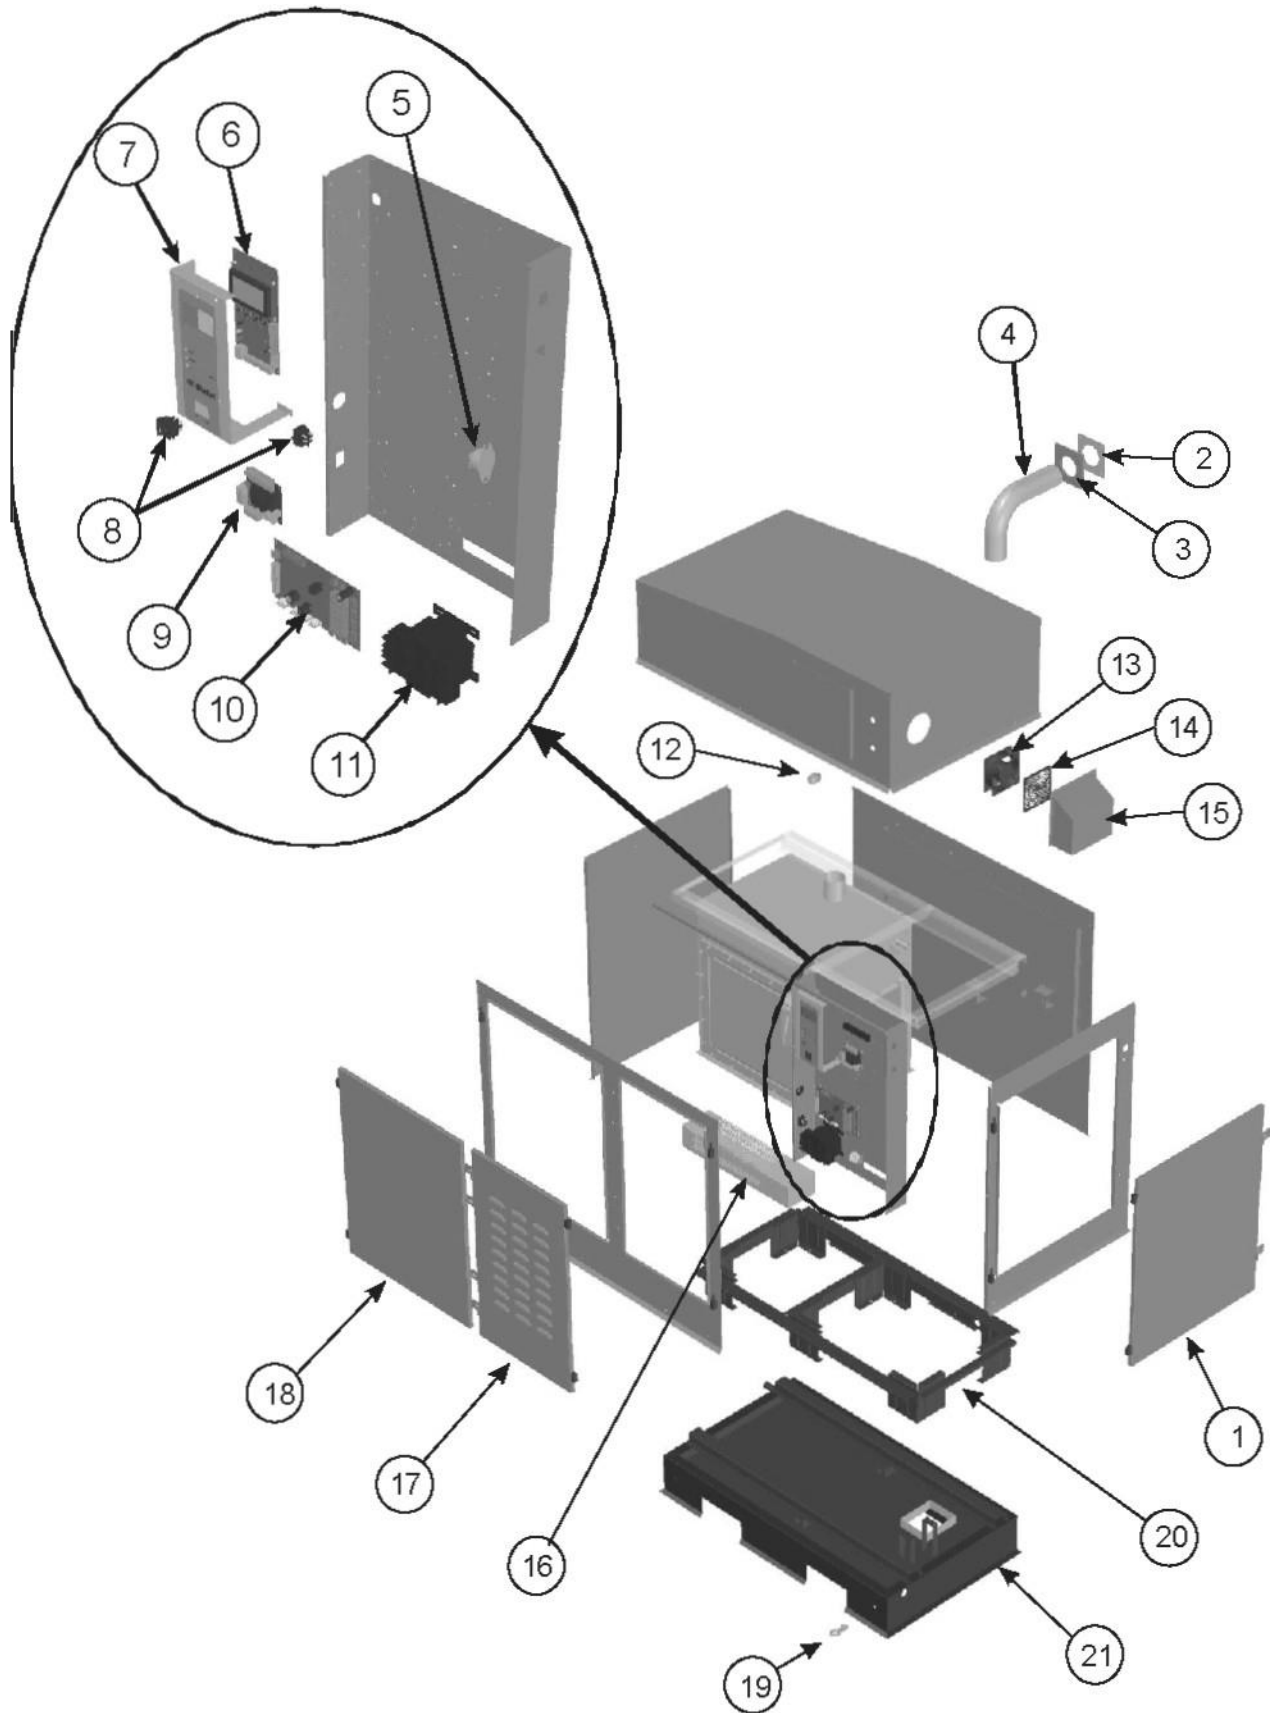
Nortec SETC/P00- 050 Cabinet and Electrical Parts
